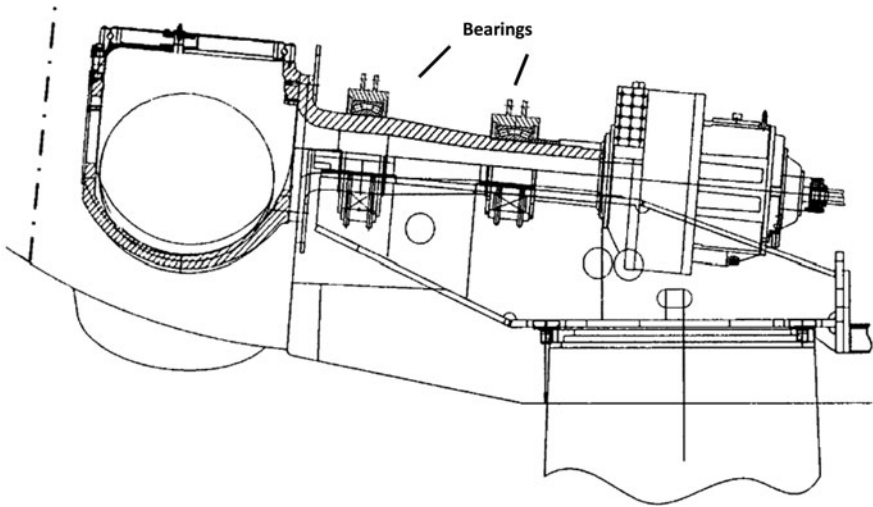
Drivetrain layout featuring two bearings outside the gearbox supporting the main shaft, from [28]
